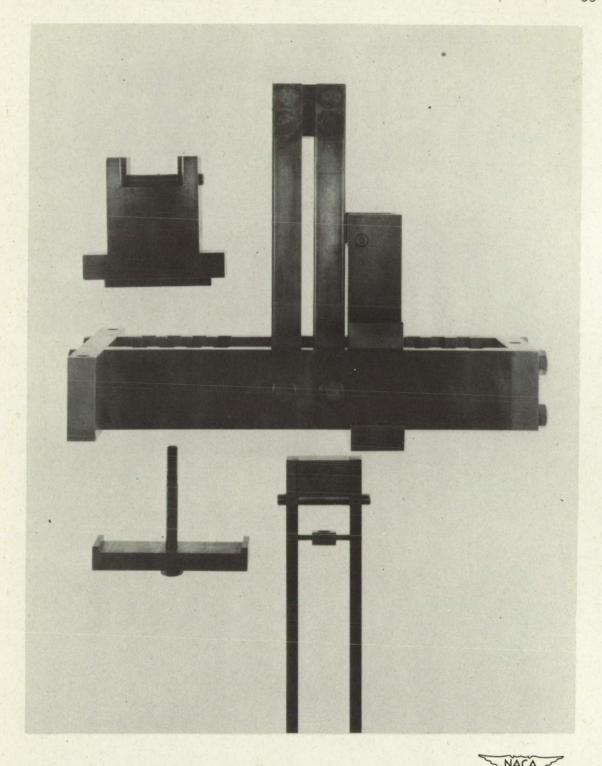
Flexural jig partly disassembled; left support block and clamp and loading stirrup have been removed and rotated through 90°.
